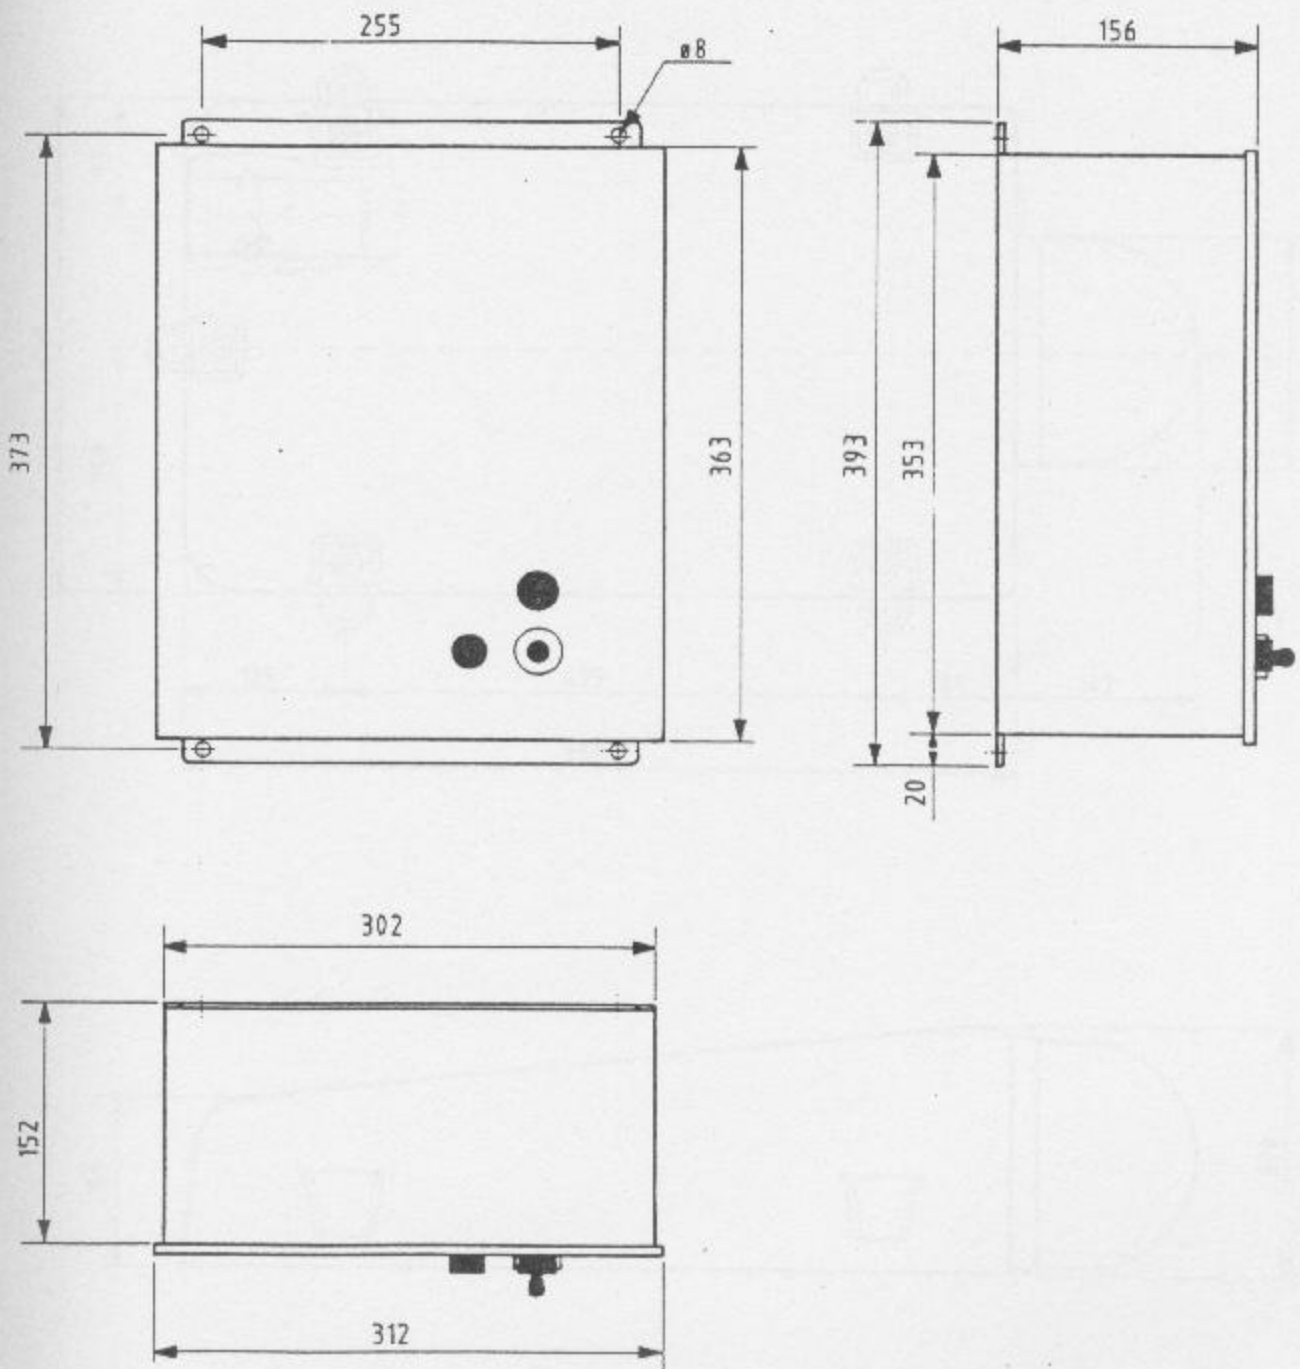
Drawing with dimensions power supply/amplifier unit.
